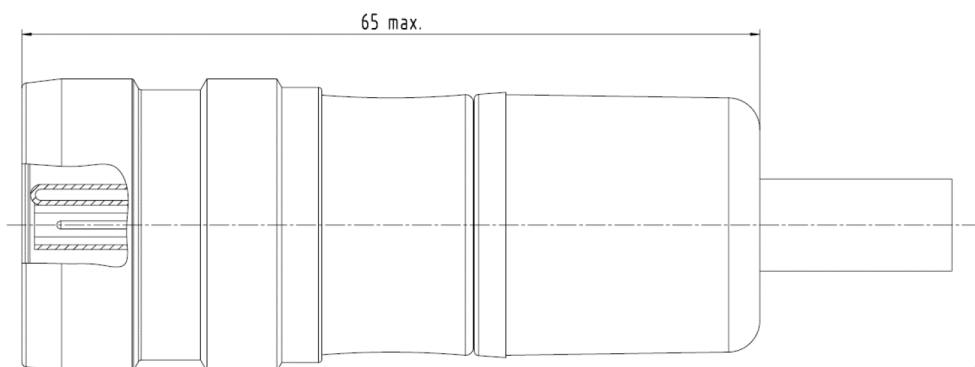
Style 6P-M12, 6P-P12 mating dimensions
